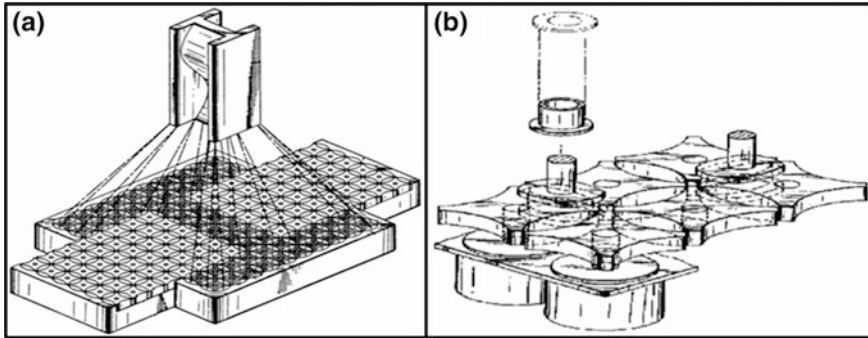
Schematic view of a 3D rotary braiding machine. b Yarn carrier actuation unit [86]
